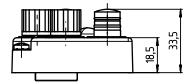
Dimensioned drawing BPS with KB 301-3000 connection hood
